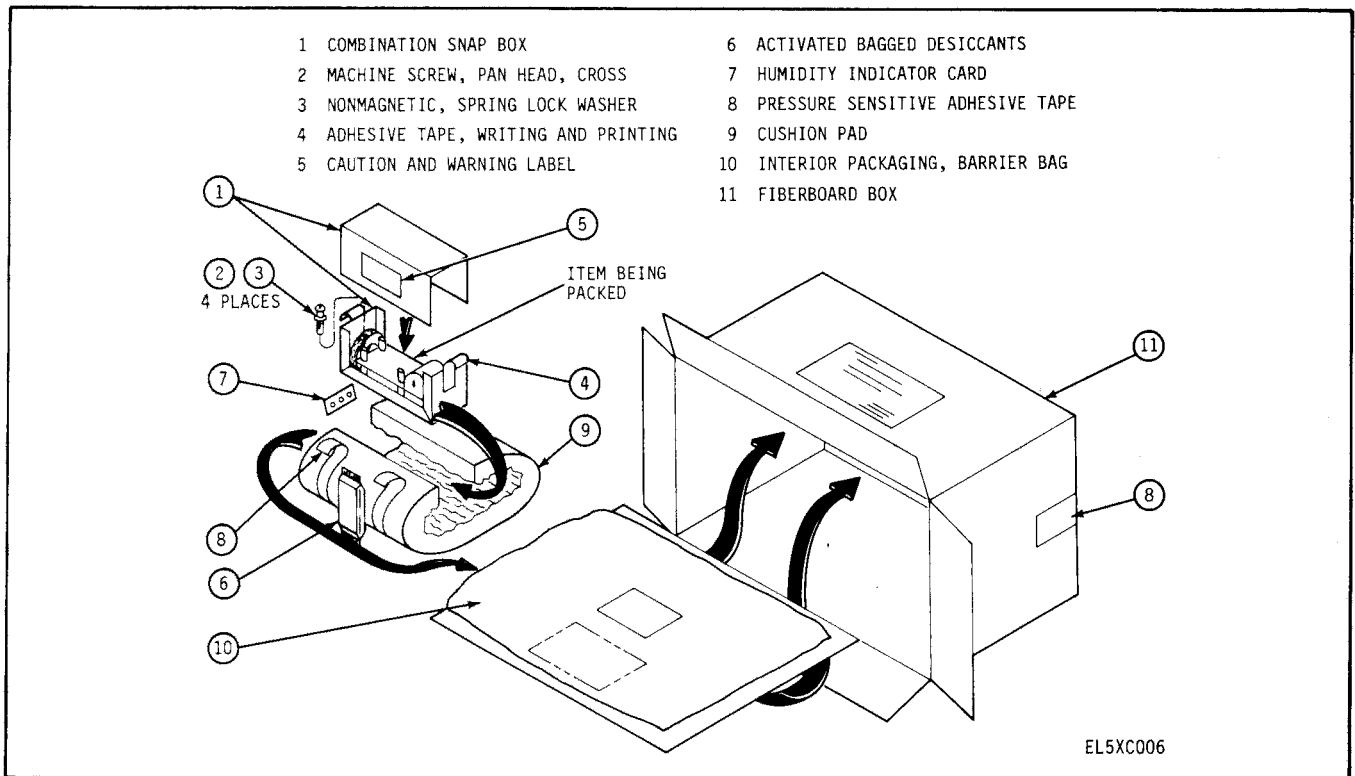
Indicator Board No. 1 Packaging Diagram
